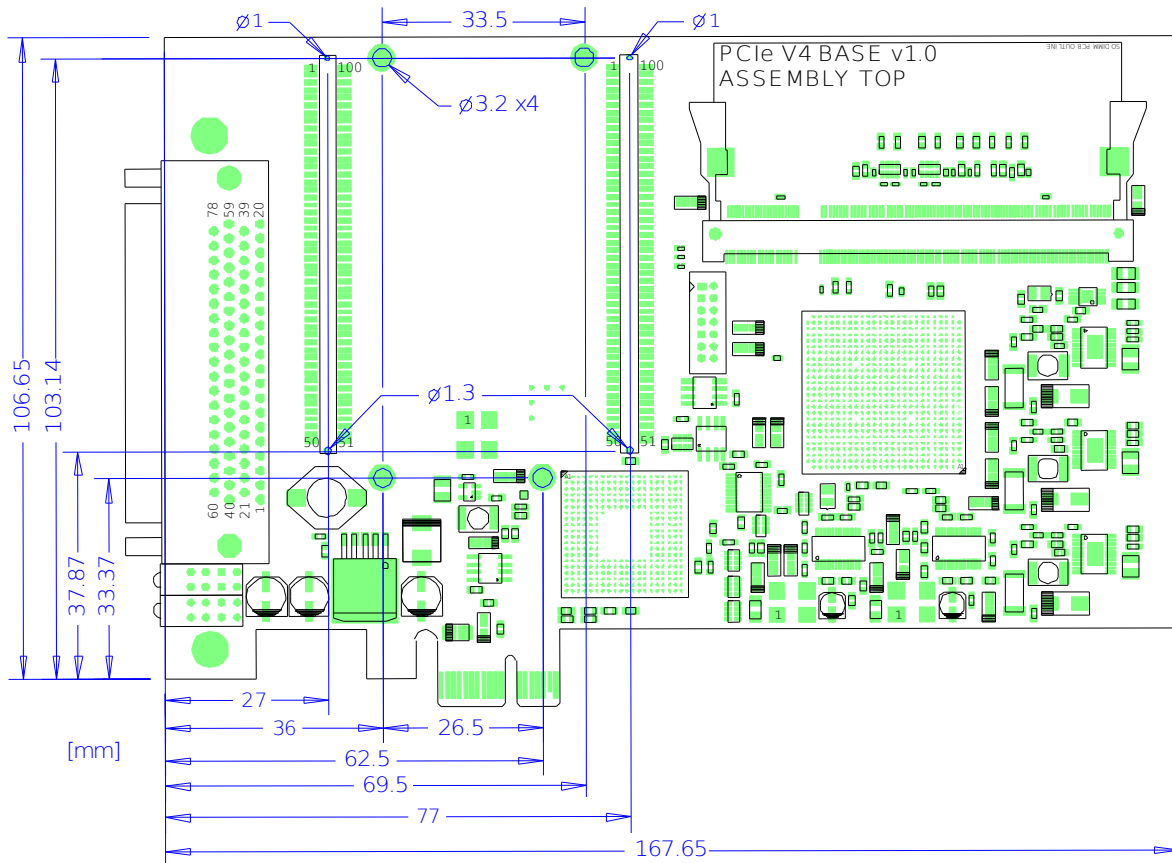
PCIeV4BASE* outline drawing and dimensions
